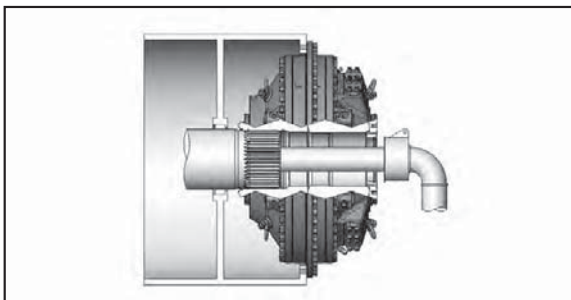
Flange mounted motor with splines and through hole for cooling of the driven machine.
